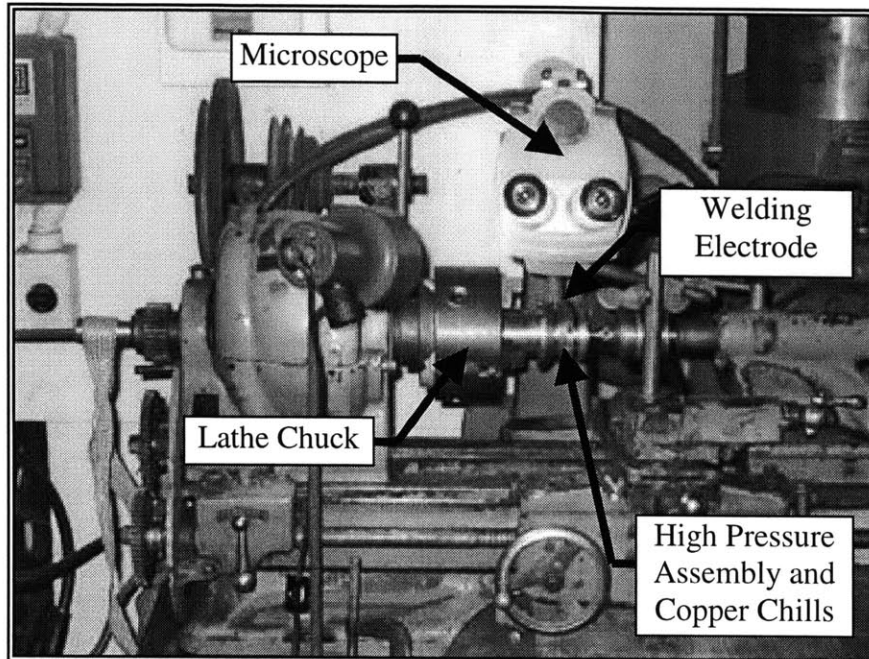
The copper chills can be seen in place on the modified lathe before welding commences on the high-pressure assembly
